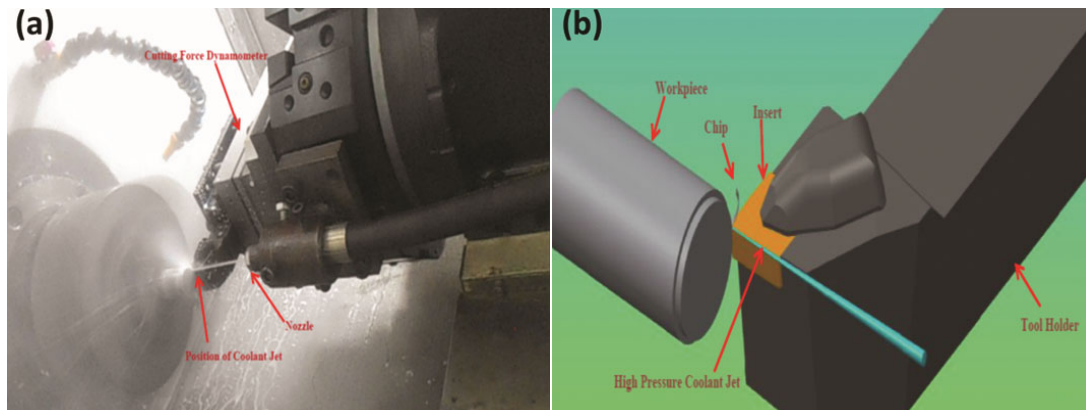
Nozzle position and 3D CAD model for nozzle position.
